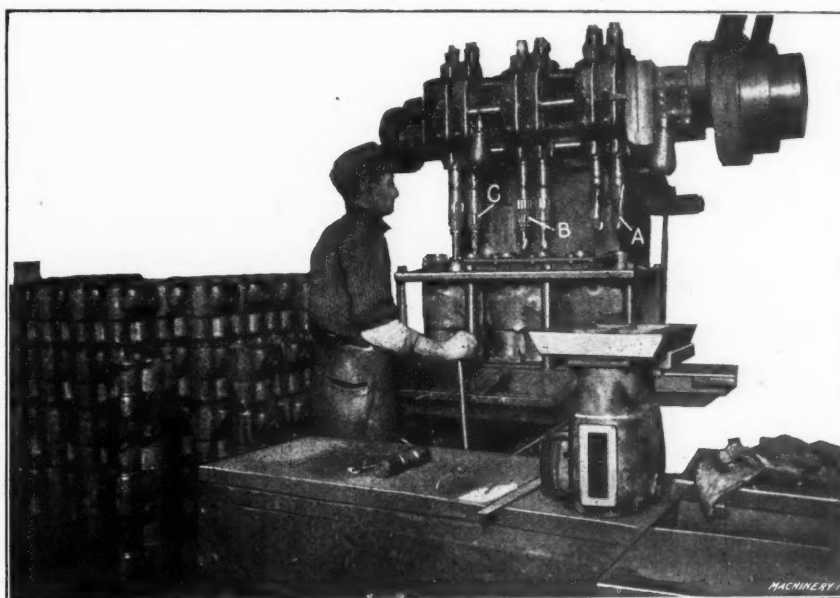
Drilling, rough-boring and finish-reaming Exhaust Valve Seats
